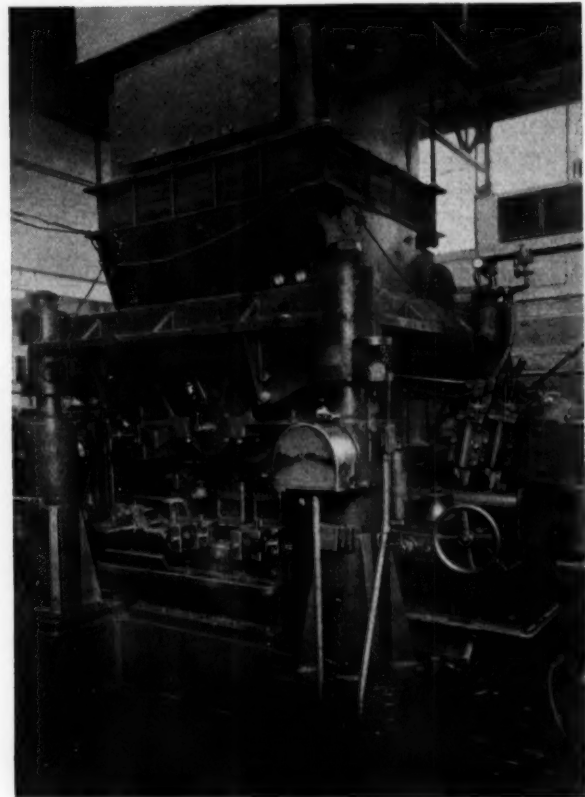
Johnston welder showing rotating disk-type electrodes and outside burr cutter
